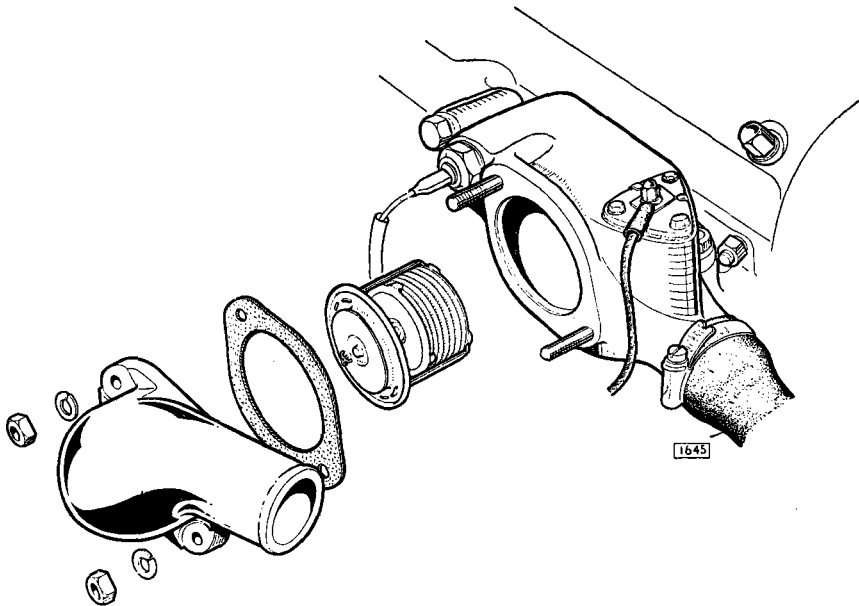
Exploded view of thermostat and housing (3.4 litre shown).
